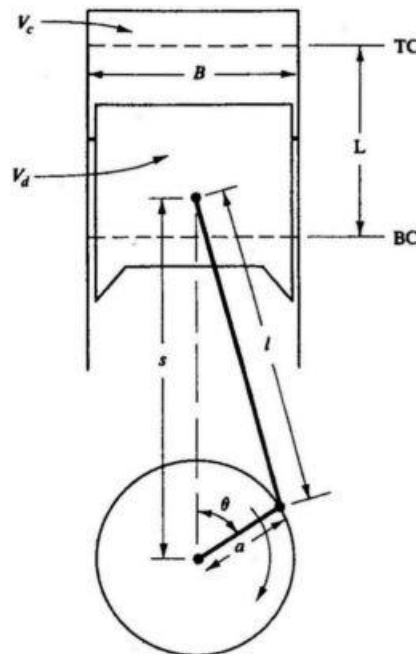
Geometry of cylinder, piston, connecting rod and crankshaft
